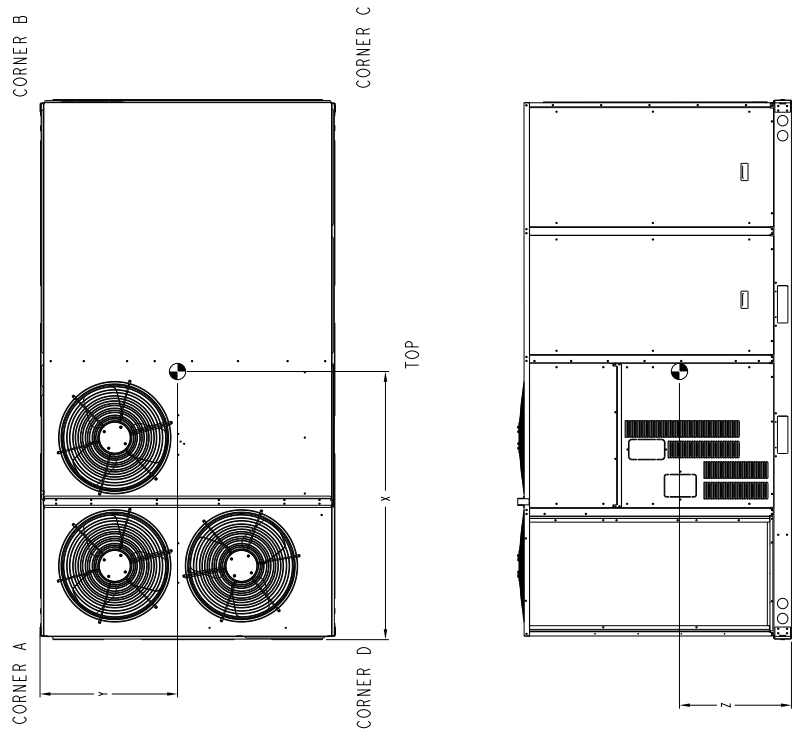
Dimensions RHH 120 (Sheet 1 of 2)
